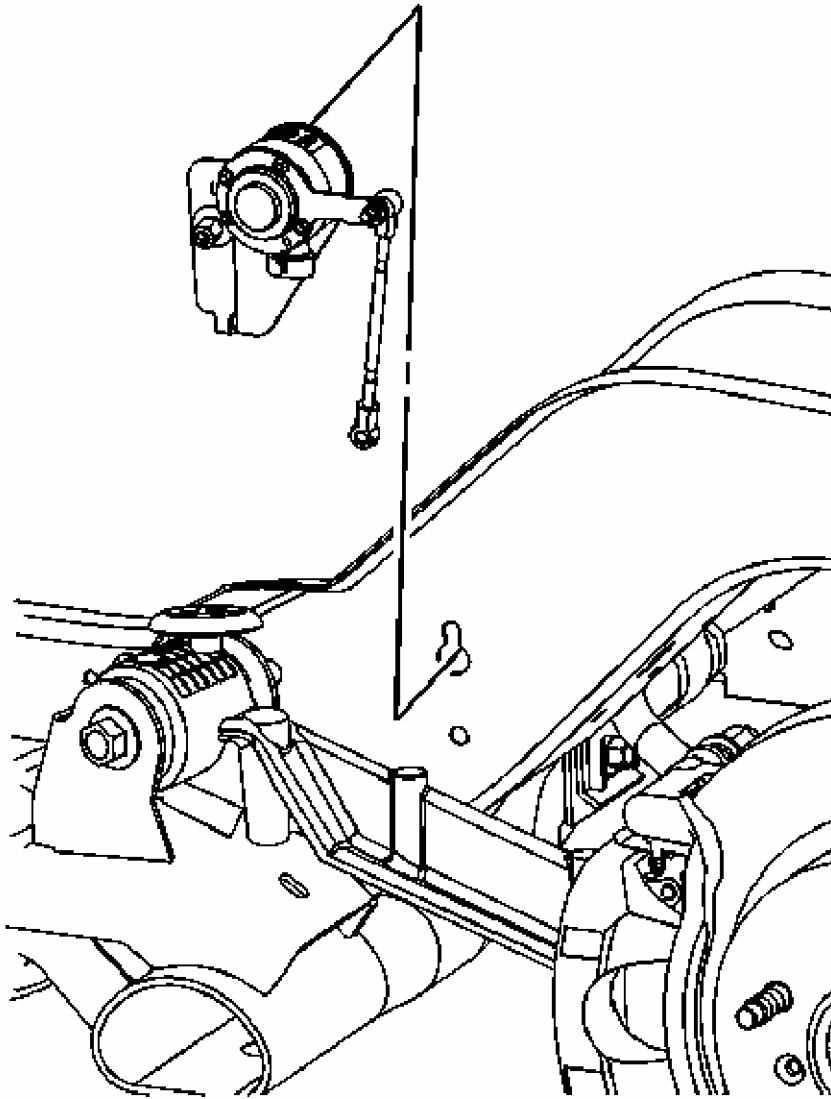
Removing/Installing Rear Suspension Position Sensor
